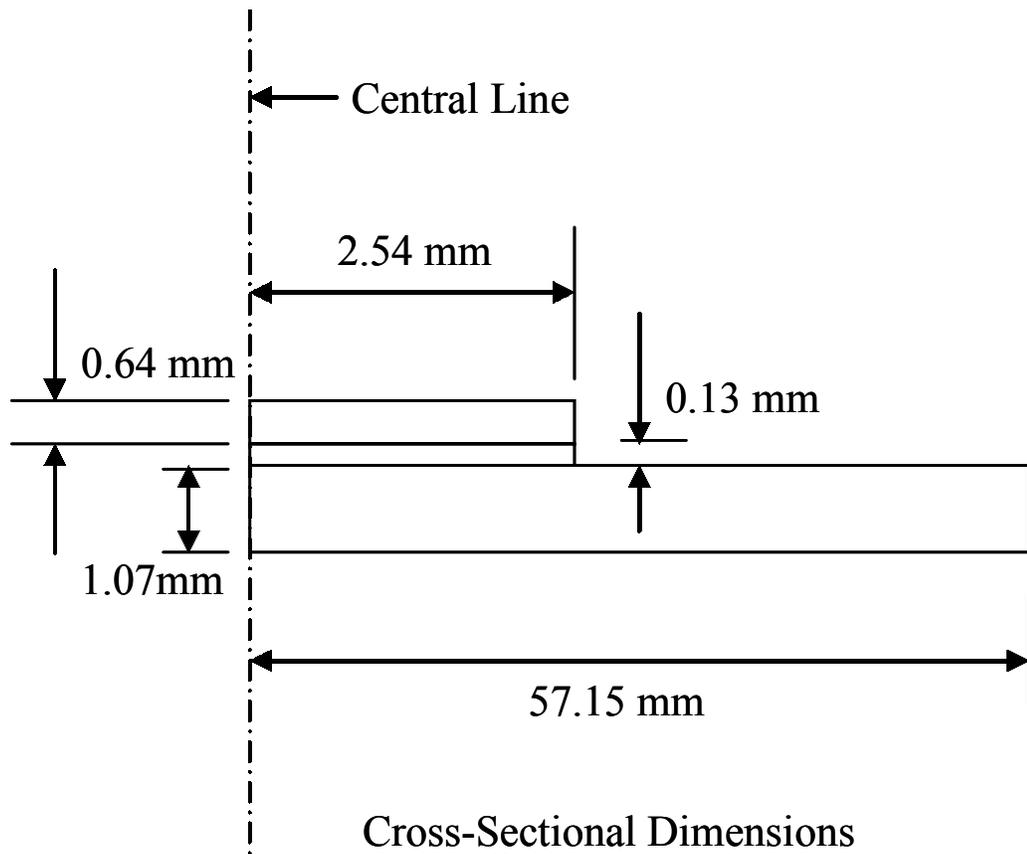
Dimensions of the Flip Chip on Laminate Assemblies
